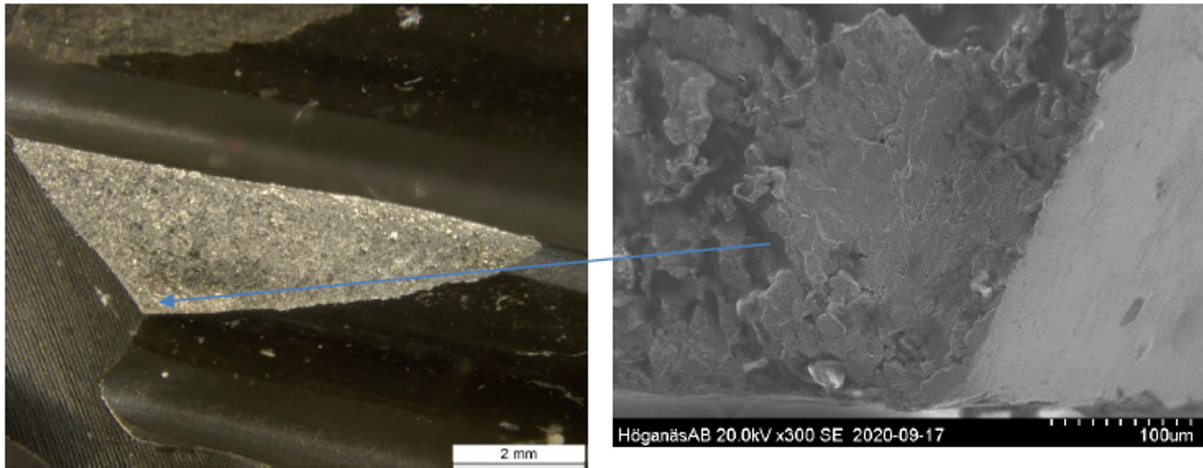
Fractured surface in the stereomicroscope (left). Fatigue fracture initiation was found in the corner (right)
